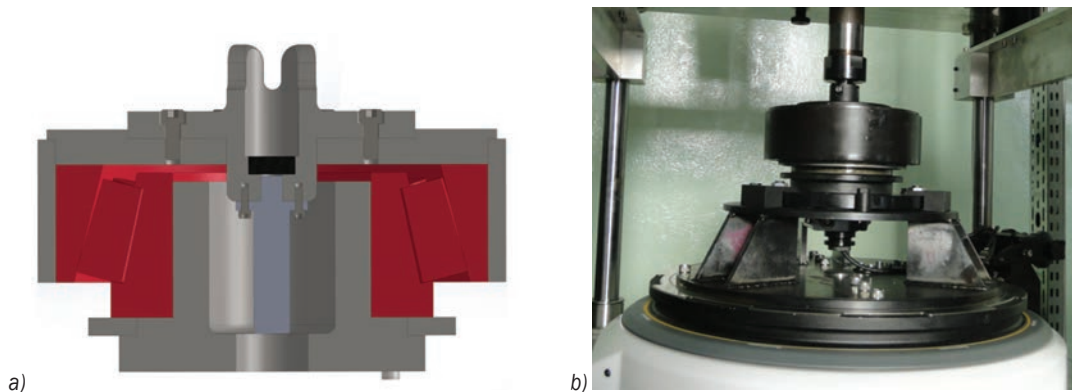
a) Cross-section of the measuring accessories assembly, and b) measuring table assembly
